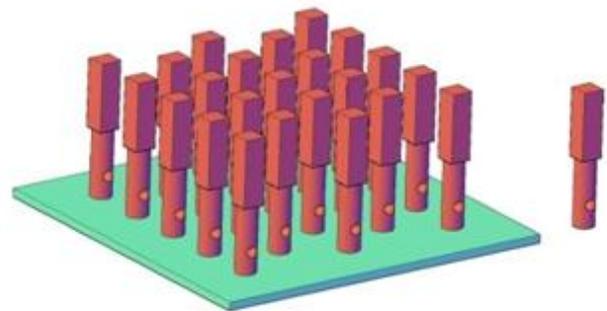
Base Plate of Compound Fins having bottom Circular cross-section
